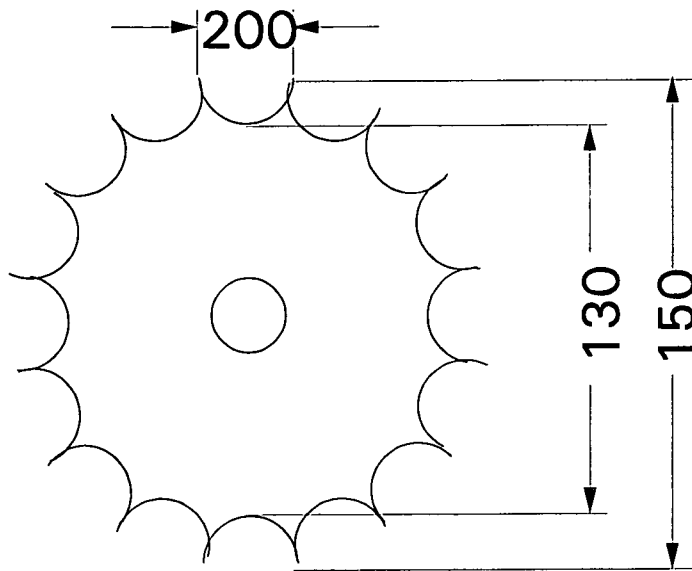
shows sketch of the gob cutter/graphite roller and its dimensions.
